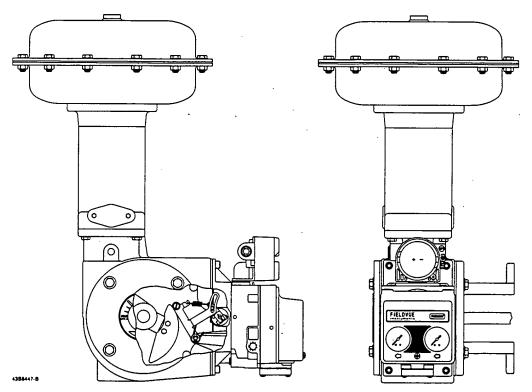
Type DVC5020 Mounted on Type 1051 Size 40 Actuator
